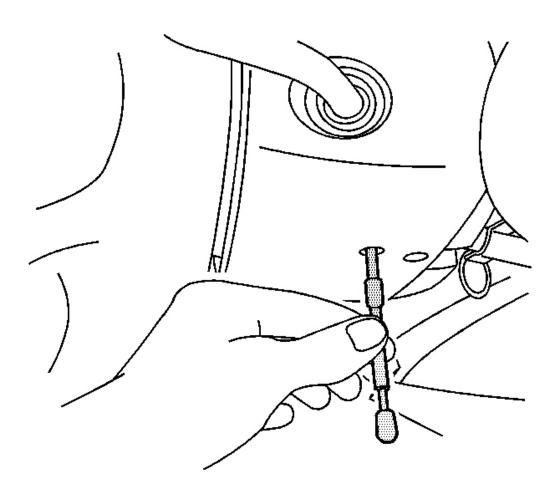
Identifying J 42640 Courtesy of GENERAL MOTORS CORP.
